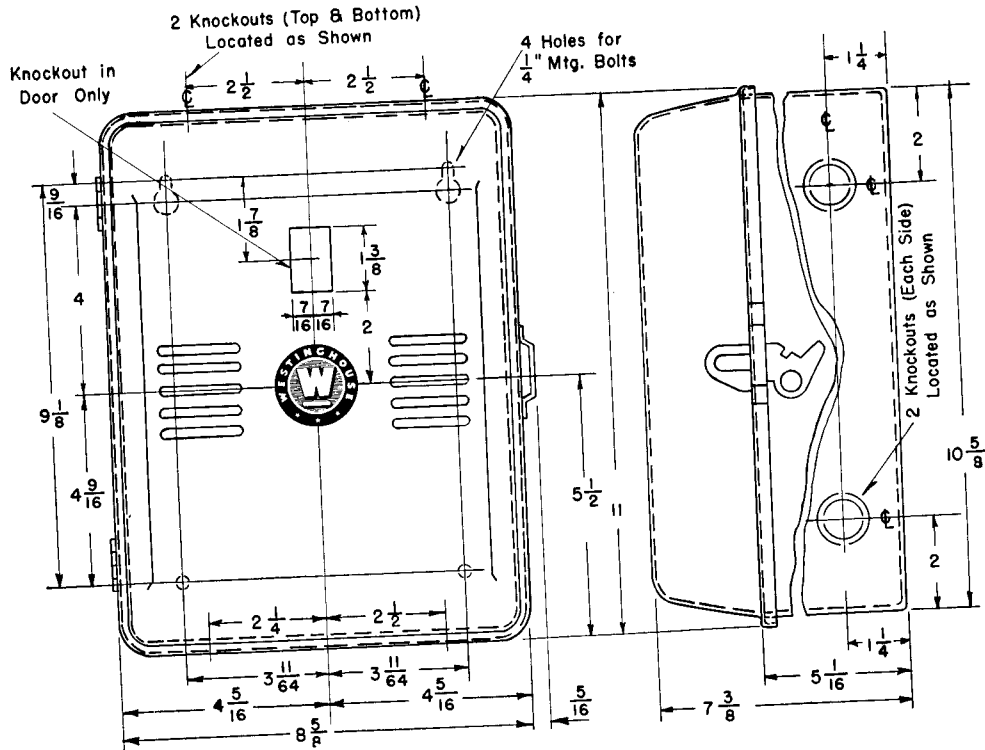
OUTLINE DRAWING FOR 25 CYCLE
